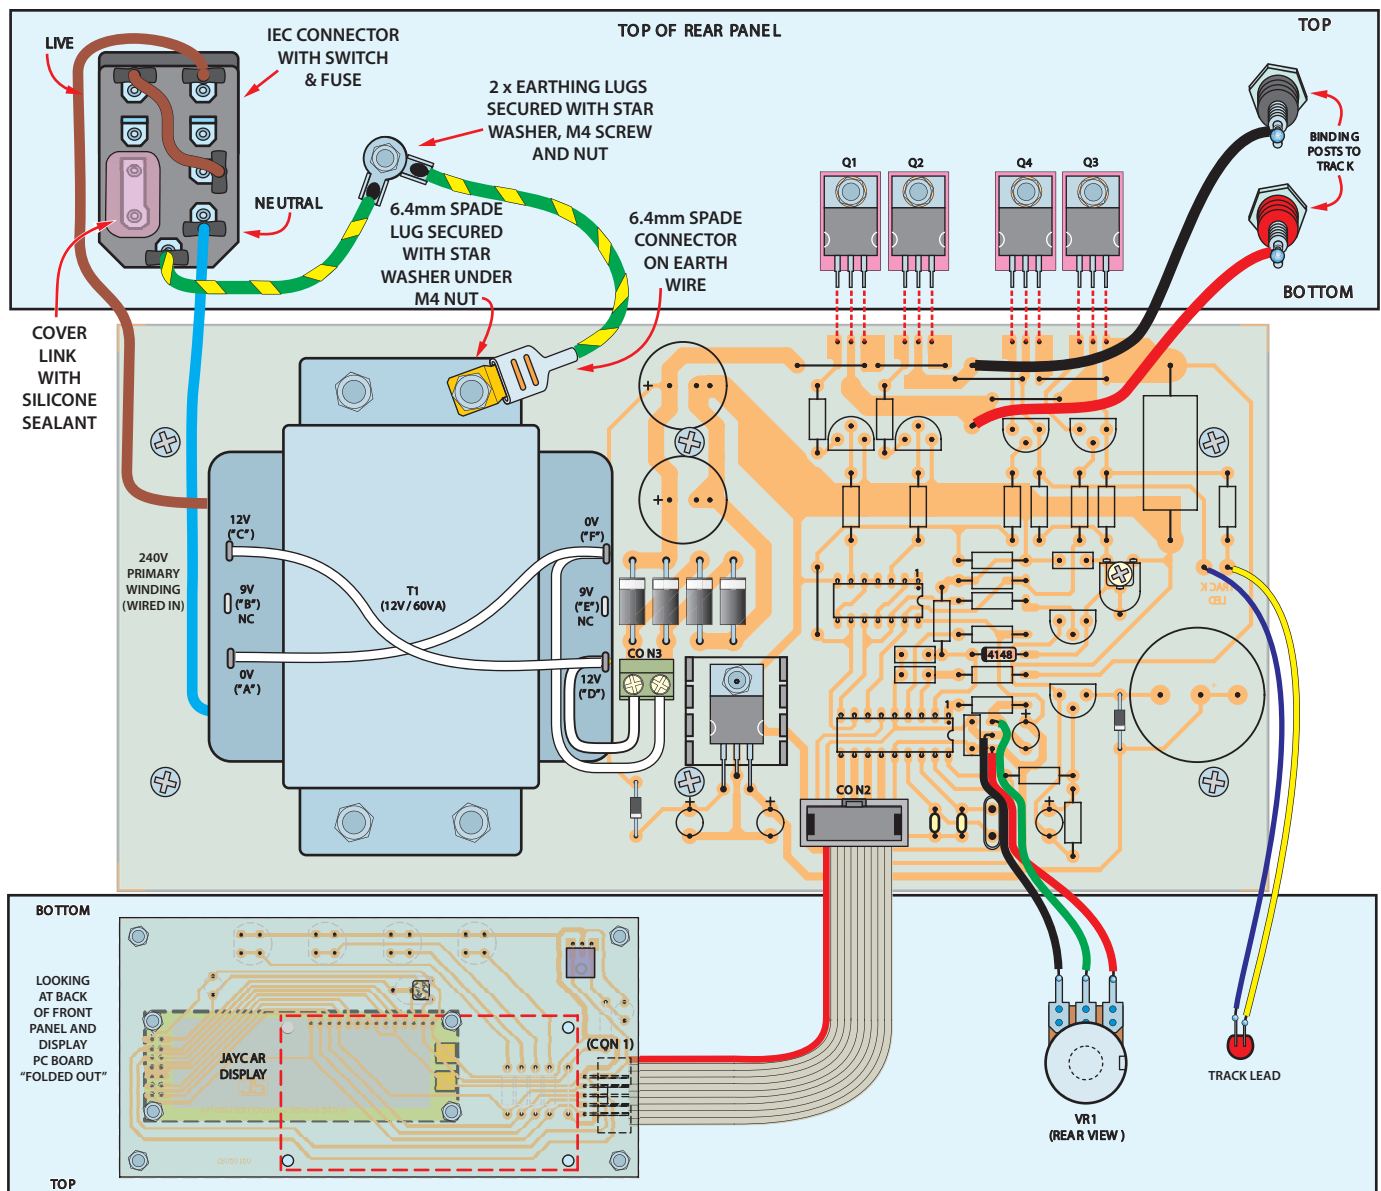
this 'opened out' view shows the wiring between the PC board and front/rear panels.
